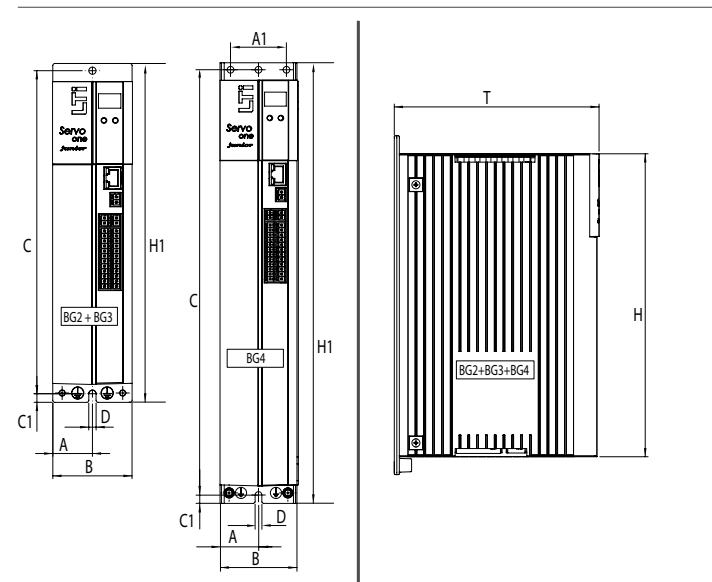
Dimensions (in mm) – BG2, BG3, BG4
